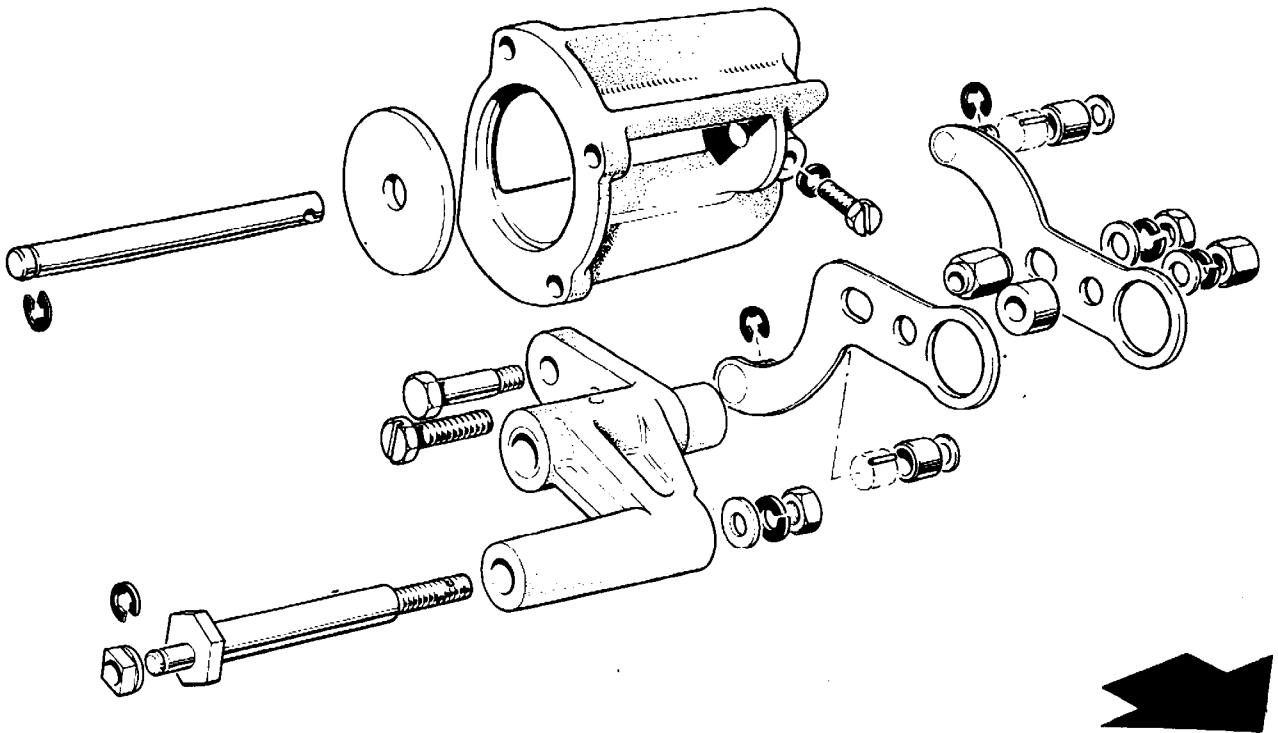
TAPE PUNCH UNIT DRIVE ARM
